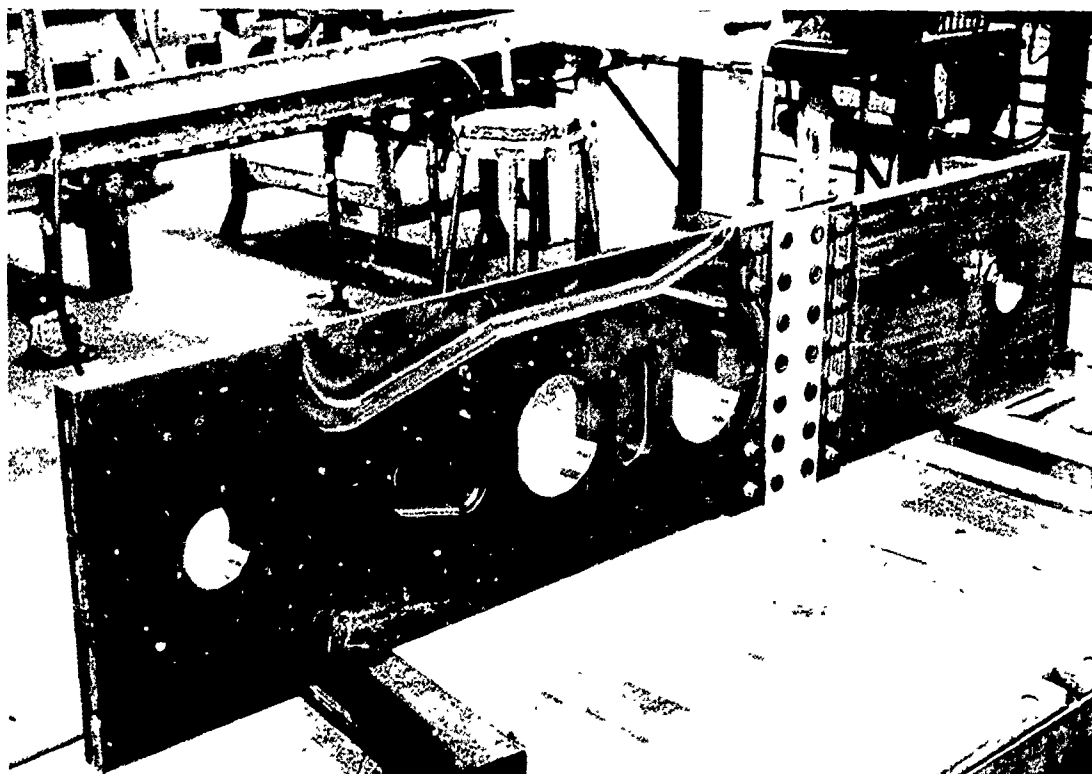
ASSEMBLED 603FTB053 (TOP SIDE AND BOTTOM SIDE)
